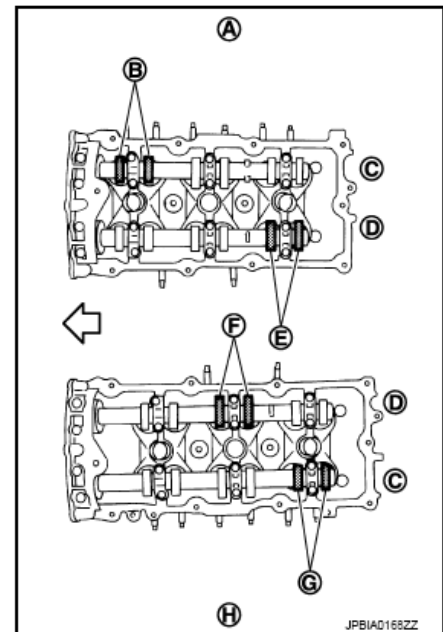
Identifying Valve Clearances Measuring Position (No. 5)
